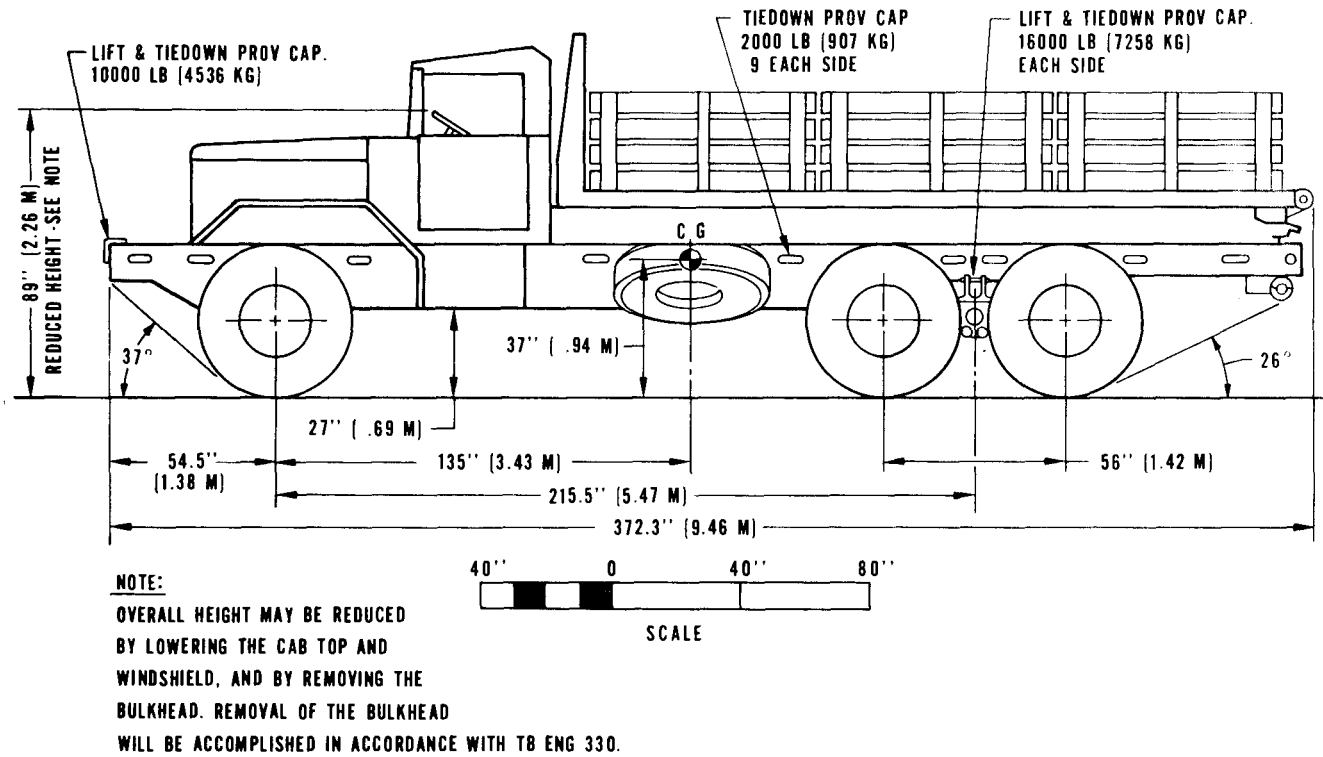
Side elevation, truck, stake, bridge transporting, WWN, mounted on M139 chassis.
